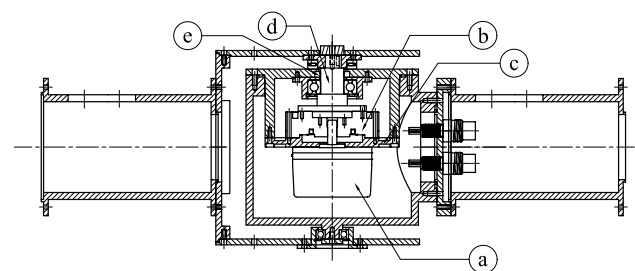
Detailed drawing of the underwater joint module for the manipulator: a a BLDC servo motor (ECflat60 100W, Maxon, Switzerland); b a Harmonic drive reducer (SCSD-17-100-2UF, SBB, Korea); c a torque transducer (SETech, Korea); d a output axis; e a rotary seal (Woosung Mectron, Korea)
